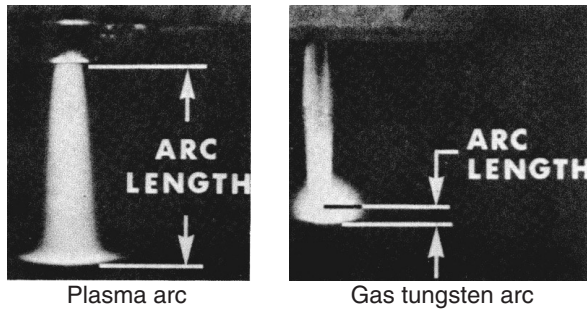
Comparison between a gas–tungsten arc and a plasma arc. From *Welding Handbook* (5). Courtesy of American Welding Society.
